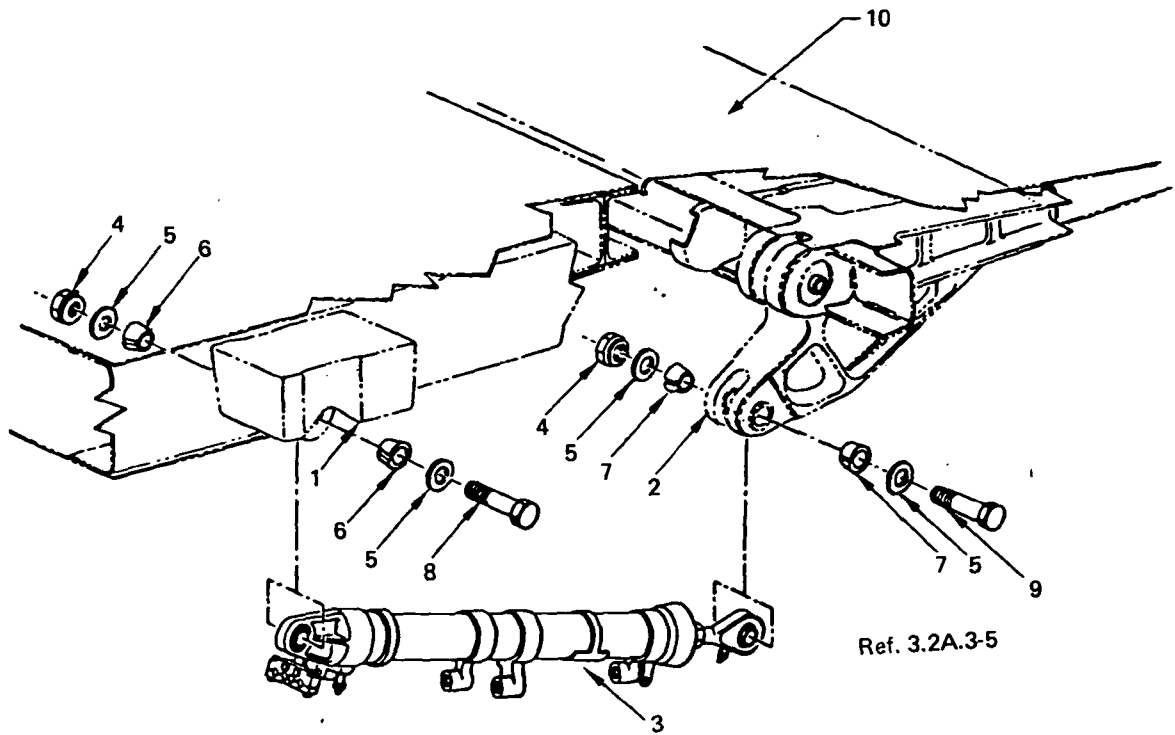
A.3-4. Outboard Elevon Actuation Installation
